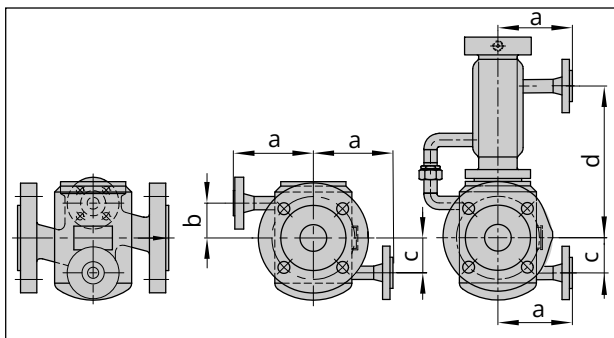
Type 3241 with heating jacket, nominal size DN 150/NPS 6 and larger · With insulating section or bellows seal (right)
